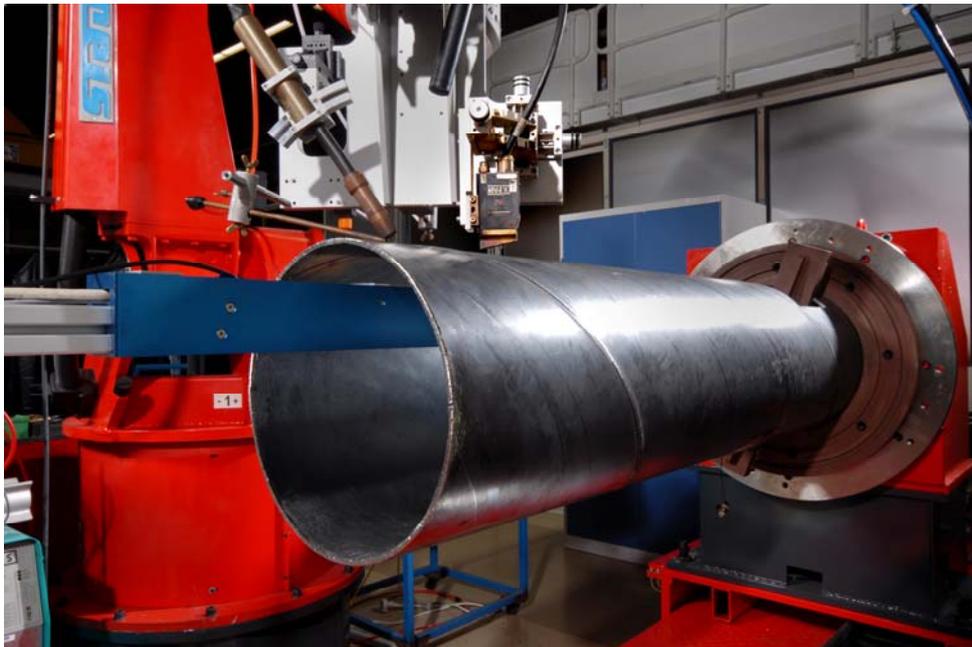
HQ-TUBES demonstrator with spiral tube specimen
